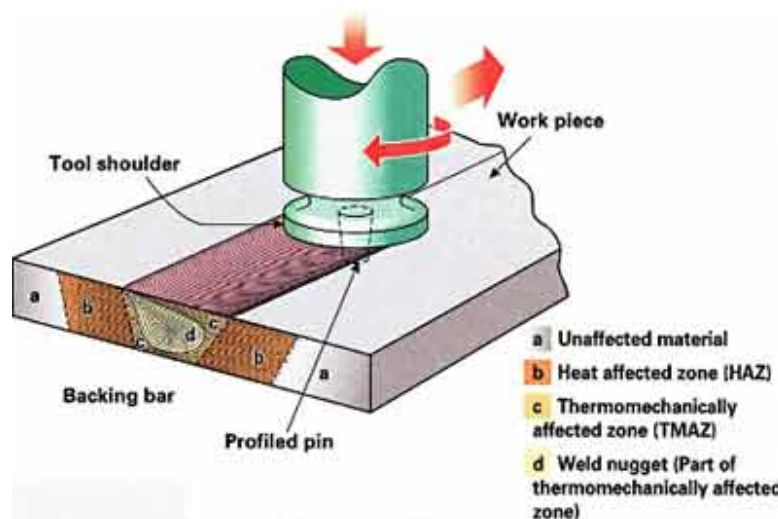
Friction stir welding process with different zones identified after the pin has joined the metals [23].
